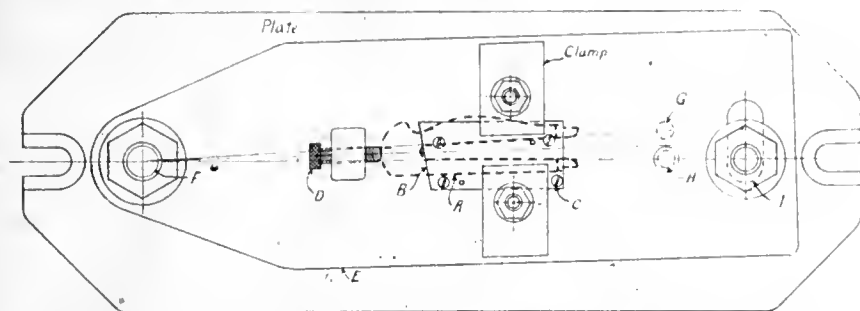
PLAN VIEW OF FIXTURE FOR MILLING INSIDE OF PRONGS
